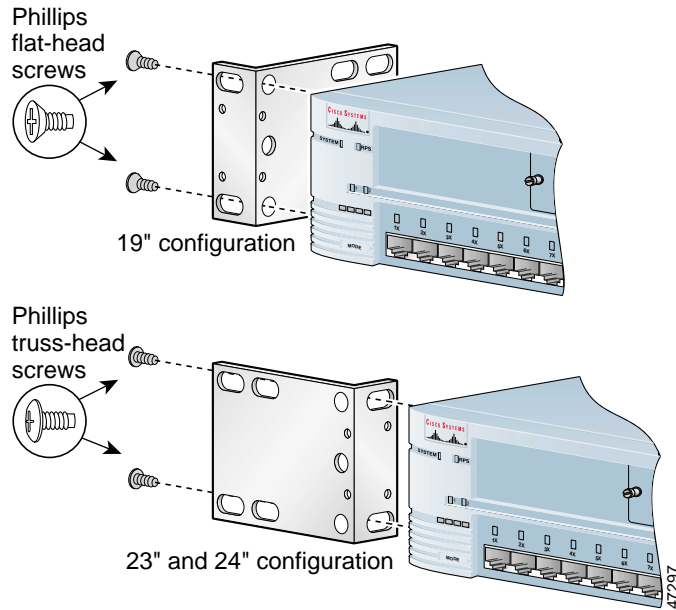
Attaching Brackets on Catalyst 2912 XL, 2924C XL, 2924 XL Fixed-Port Switches (Rear-Panel Forward)
